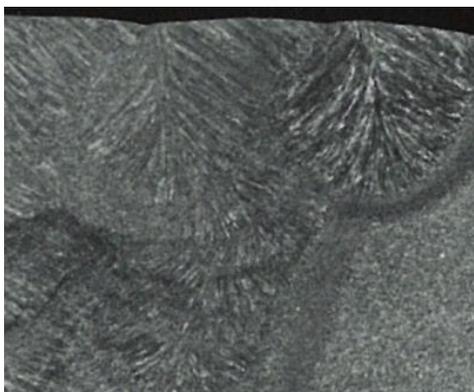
Macrostructure of NIMOL 490K welded joint.
